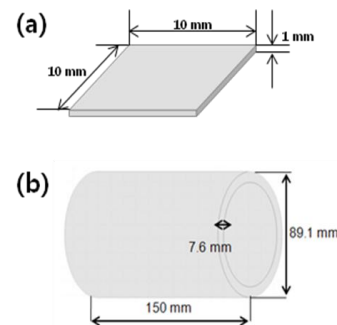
Schematic of specimens for corrosion potential test (a) and SCC behavior test in piping system (b).
